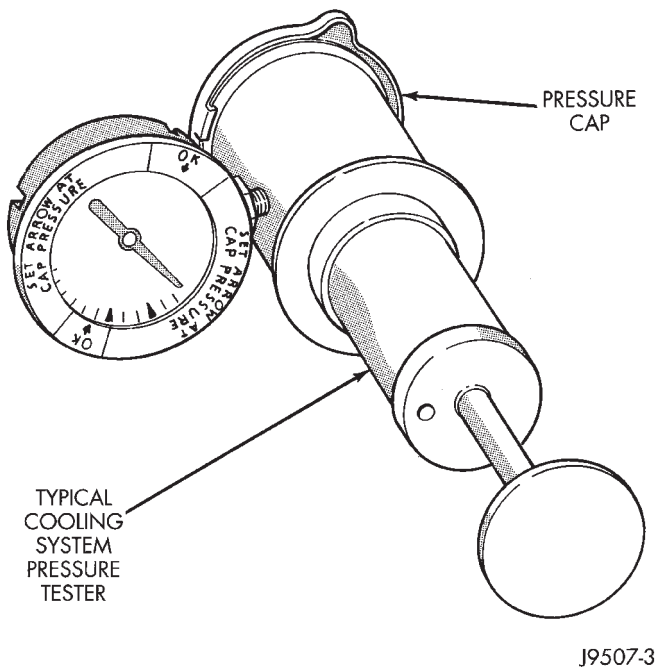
Pressure Testing Radiator Pressure Cap—Typical
